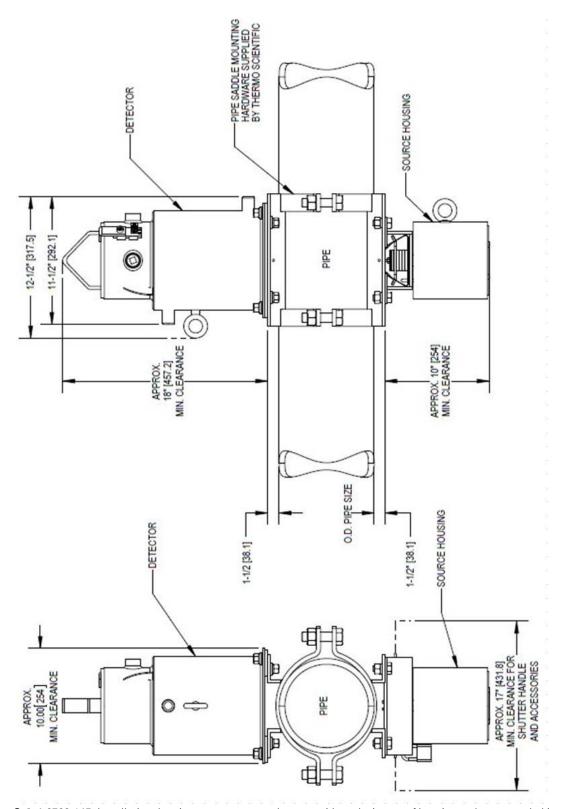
4-0700-145: Installation drawing, remote system detector with explosion-proof housing and water-cooled jacket
